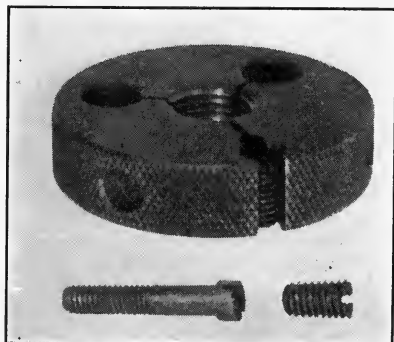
Typical Thread Gage—Pratt and Whitney Company
